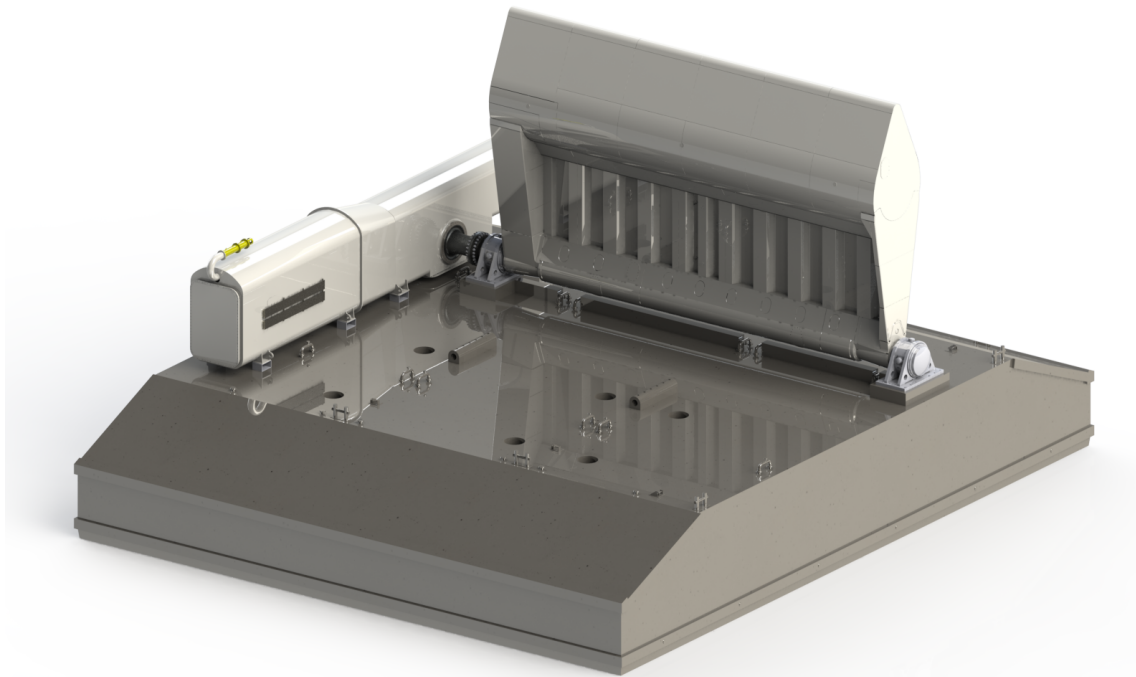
3D model of the complete WEC, demonstrating the concrete foundation, the panel and the PTO.
